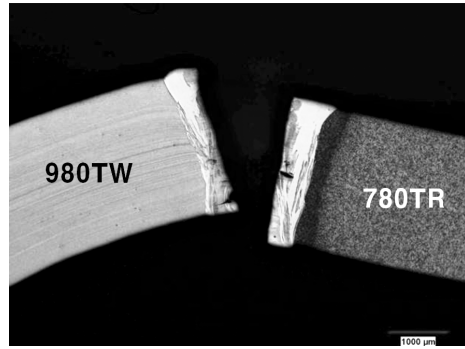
Cross section of laser welded 980TW/780TR joint using Y309L filler wire after erichsen test
